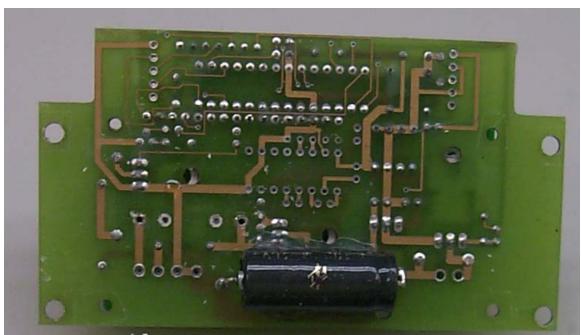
LCD Board Sockets Removed and Wiring is Connected Directly to Control PCB
